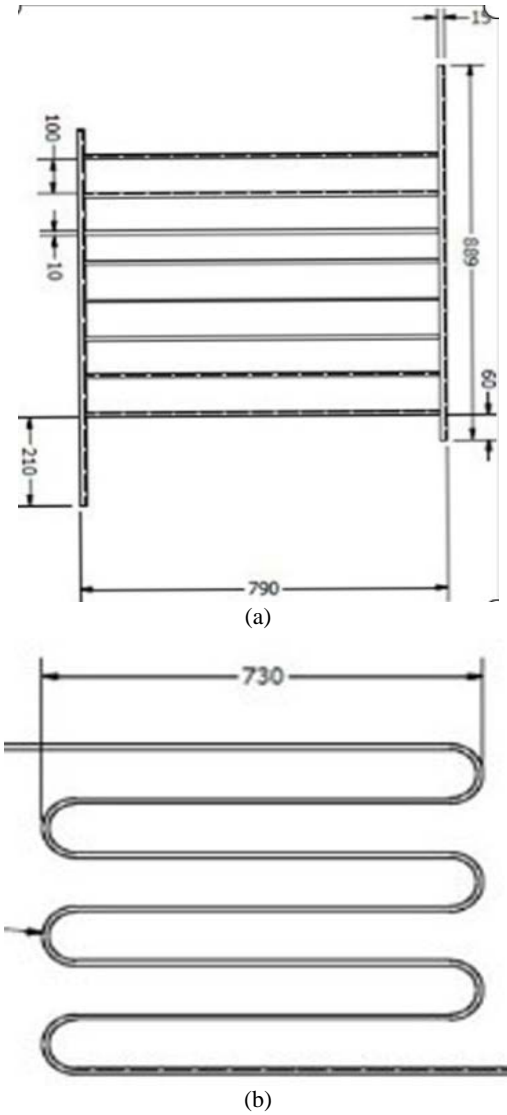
Collector tubing of (a) header-riser section of the collector and (b) serpentine section of the collector
